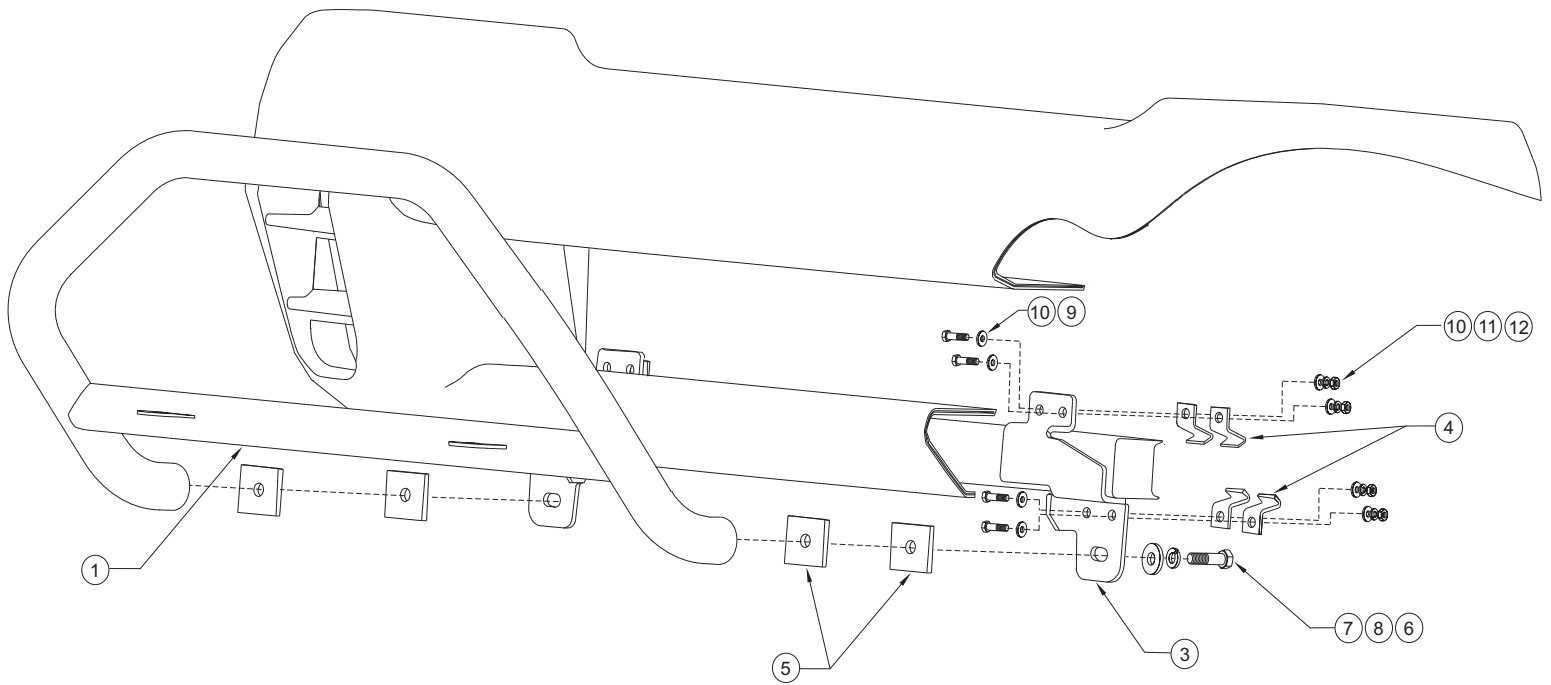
INSTALLATION VIEW OF DRIVER SIDE SHOWN, PASSENGER SIDE OPPOSITE
